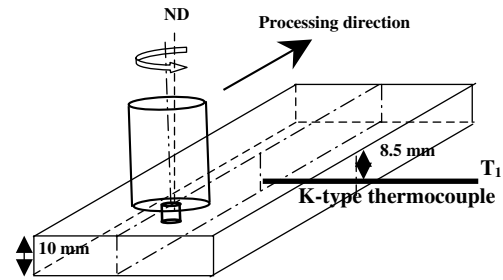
Schematic drawing showing the inserted thermocouple positions in the FSP specimens.
